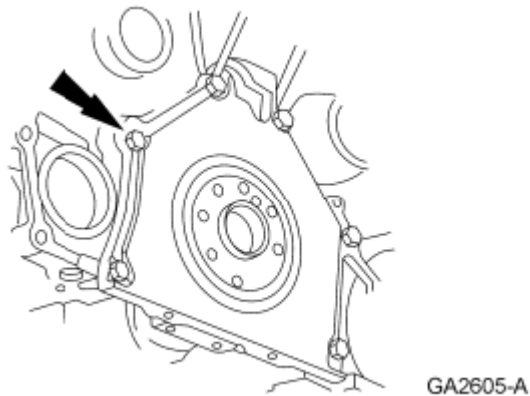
Locating Crankshaft Rear Seal Retainer Plate Bolts
